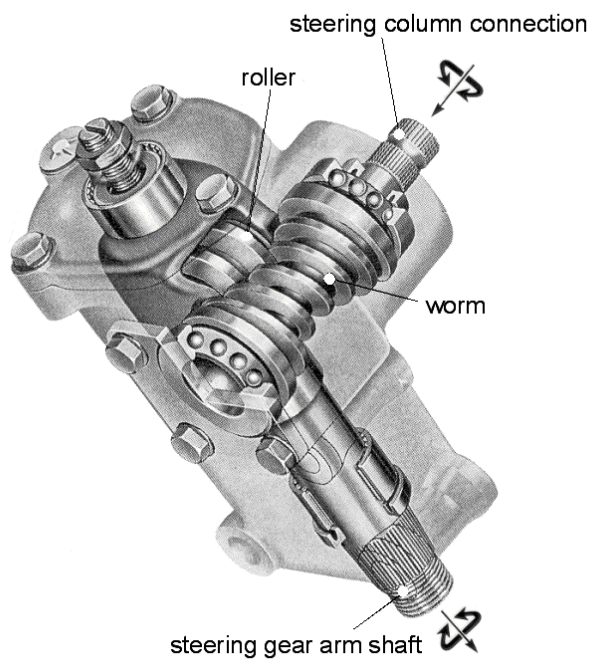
Worm-and-worm wheel steering, ZF
